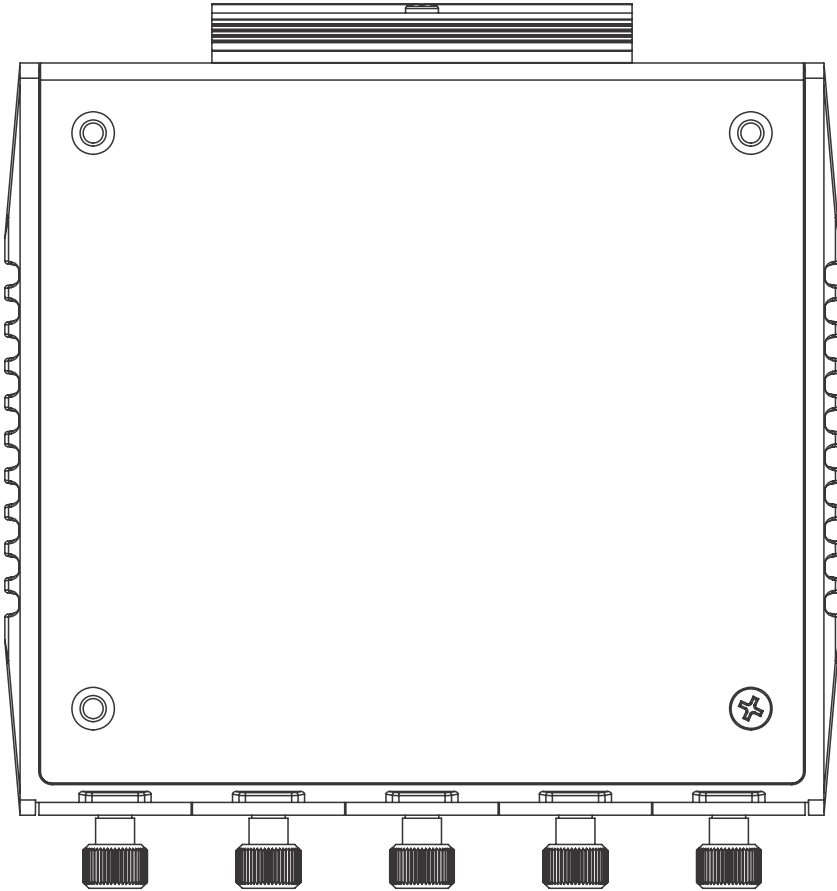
Front View (EPS-6000 EtherCAT bus coupler module installed)
